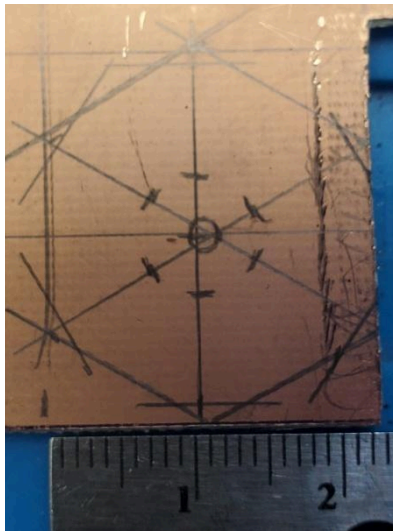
Hub blank with hole drilled and cut out of PCB stock (tip: drill hole before cutting PCB). Black lines are 8 mm long and mark hack saw cut locations.
